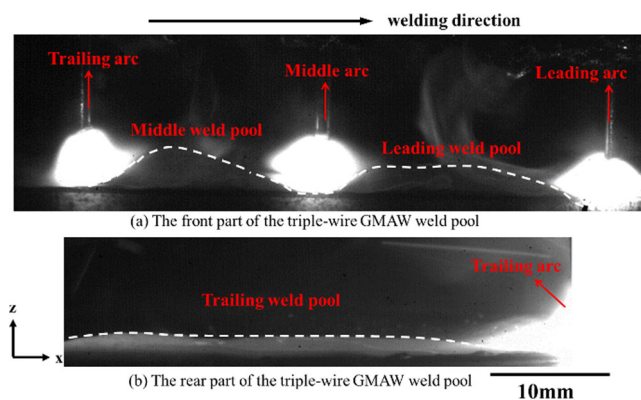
Images of the triple-wire GMAW weld pool obtained by high-speed camera
